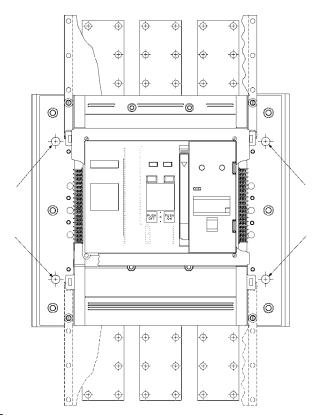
Locations of the 3 /4-inch diameter through holes for mounting the switch in equipment, 4000 A front-connected frame.
